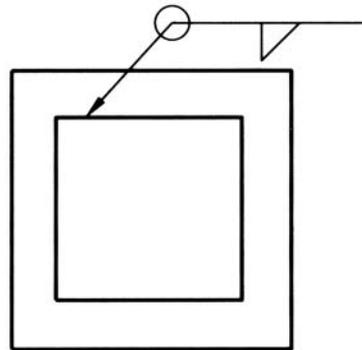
Weld Joint Designs (continued)
